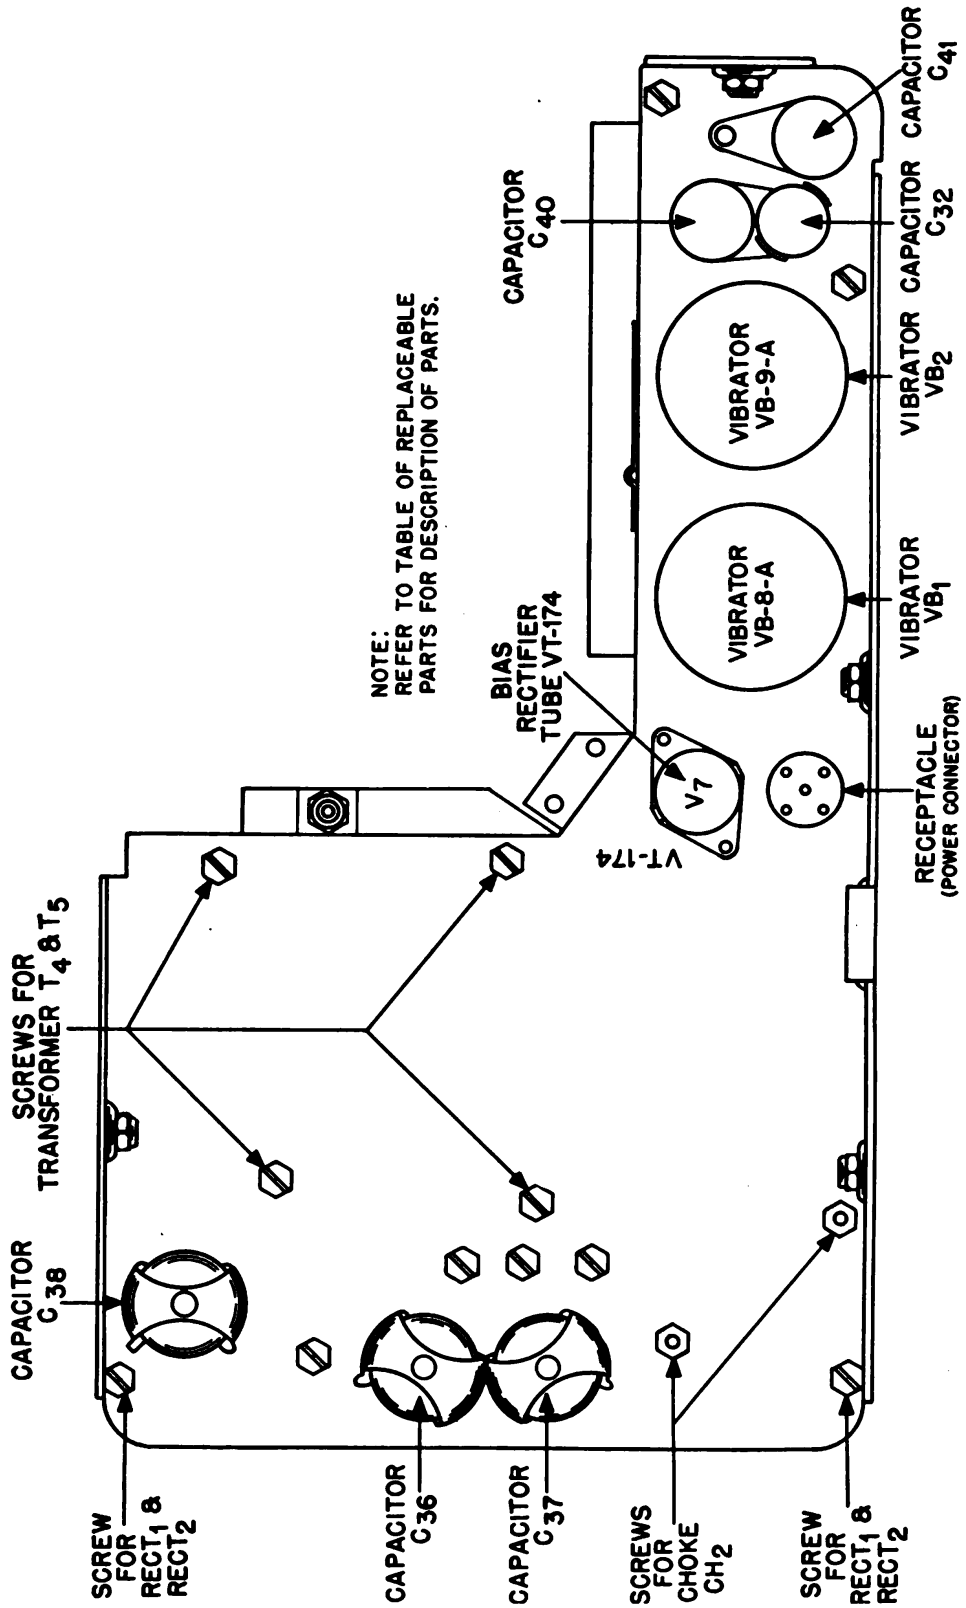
RADIO RECEIVER BC-728-A, POWER SUPPLY—TOP VIEW—SHOWING MAJOR PARTS
